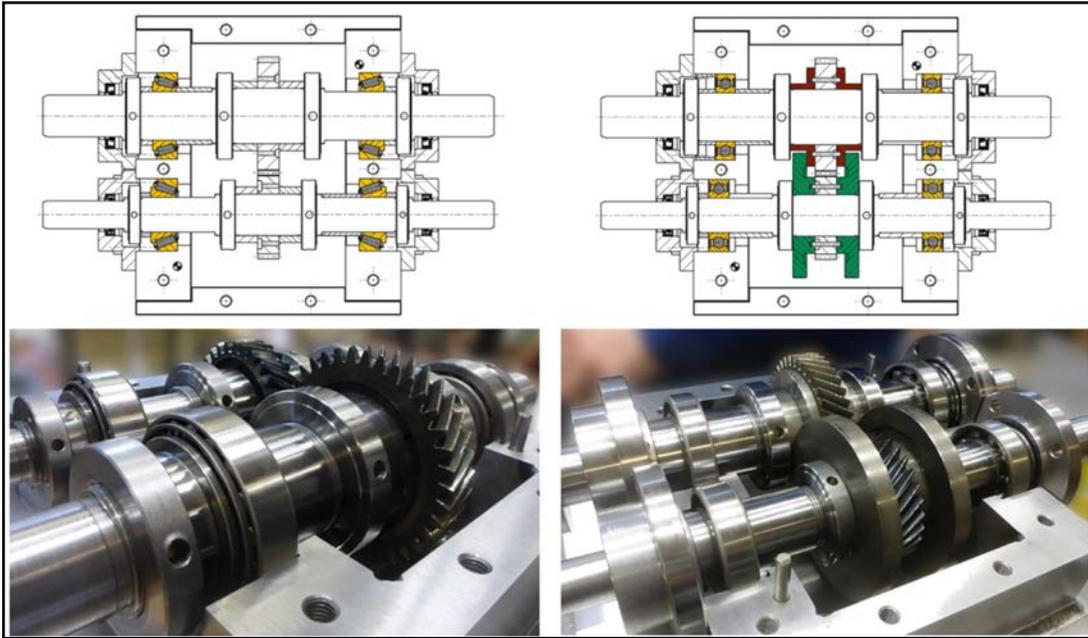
Test gearbox — equipable with tapered roller bearings (left side) or a combination of thrust cone and ball bearings (right side) as concept drawings (top) and assembled (bottom) (Ref. 6).
